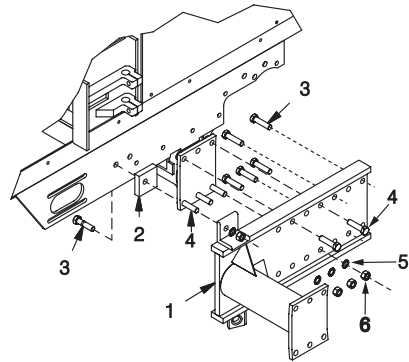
Mounting Spacer & Tandem Plate
